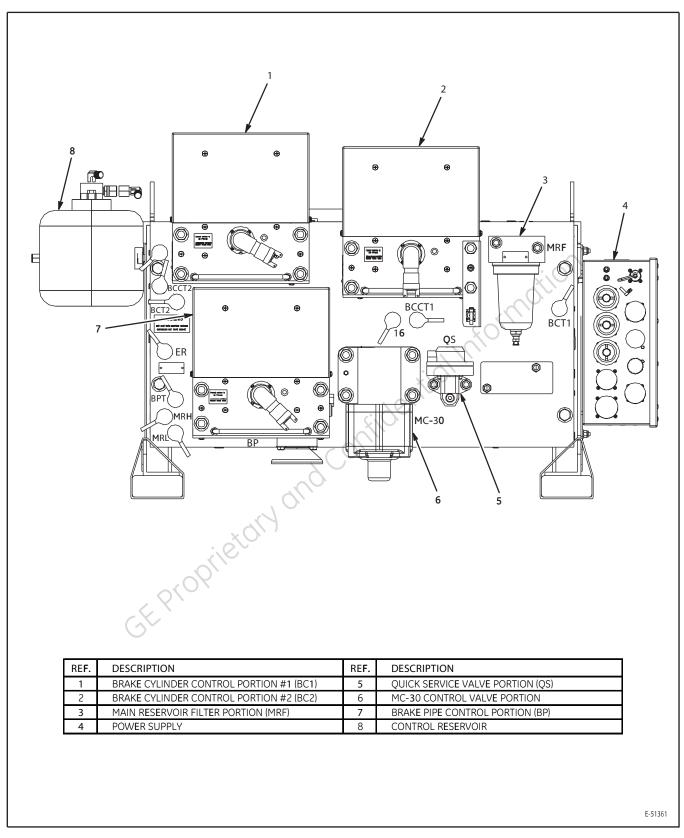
Air Brake Compartment — Pneumatic Operating Unit (POU) Component Locations.
